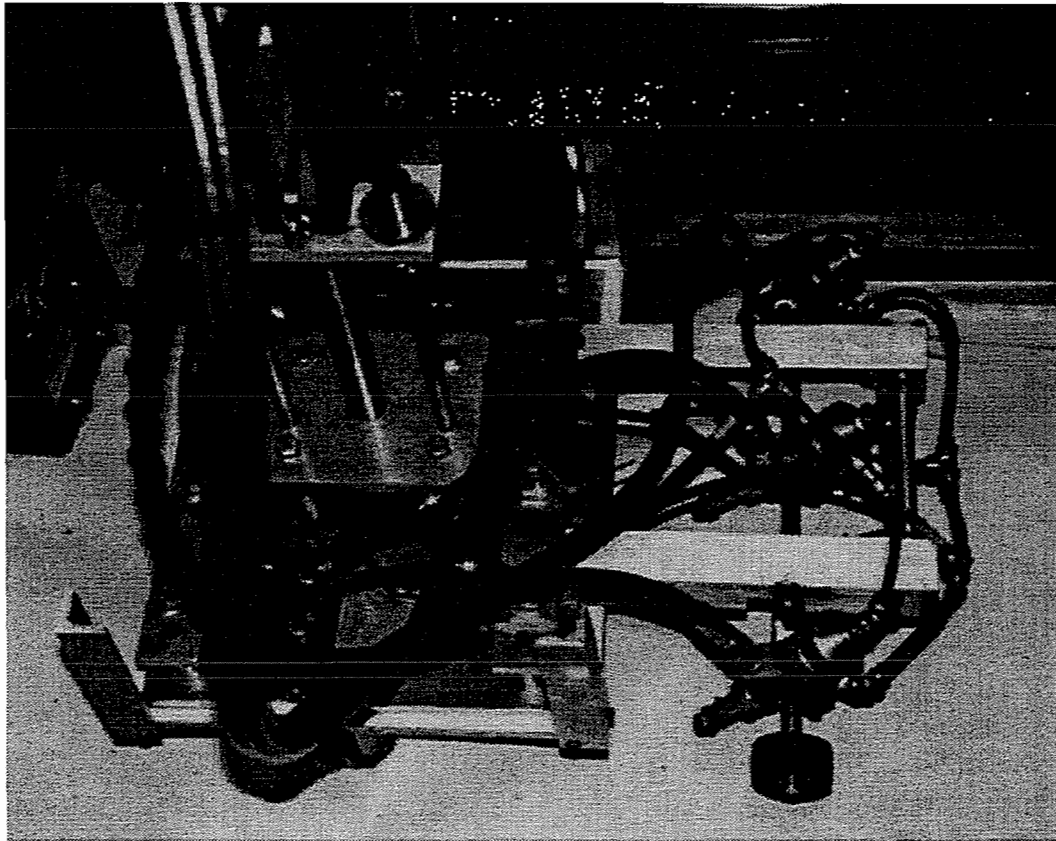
Mounting of Glue Nozzles to End Effector
